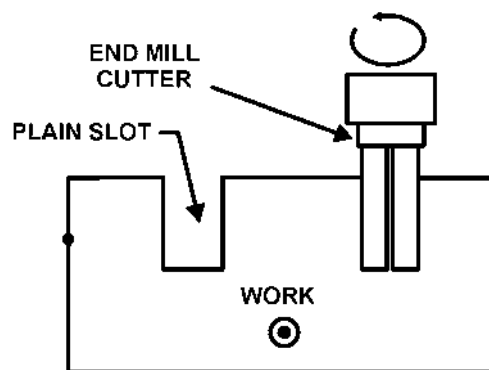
, Milling a plain slot by means of an End Mill Cutter.
